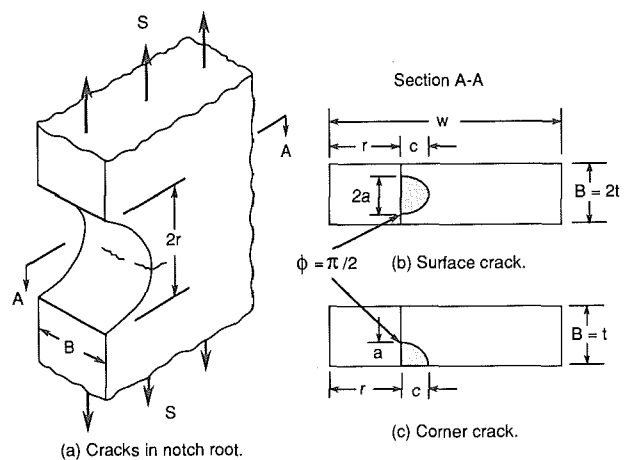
Single-edge-notch-tension (SENT) fatigue specimen with surface and corner crack.
